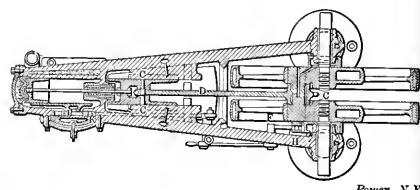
HORIZONTAL SECTION OF FIRST ENGINE
